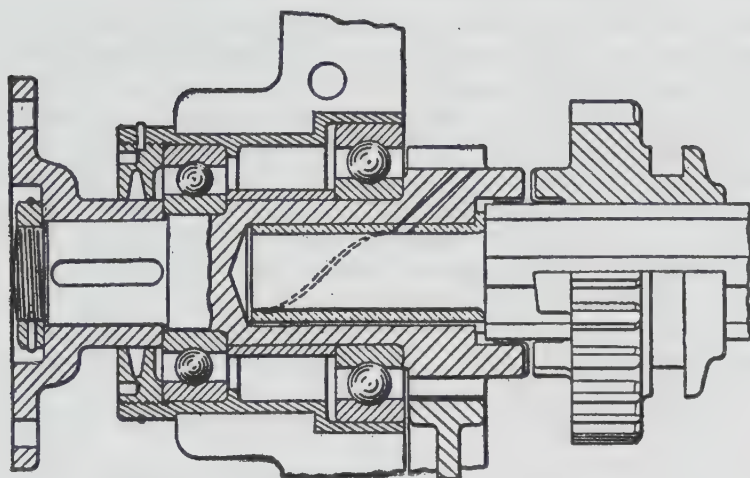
DIRECT DRIVE JAW CLUTCH.
